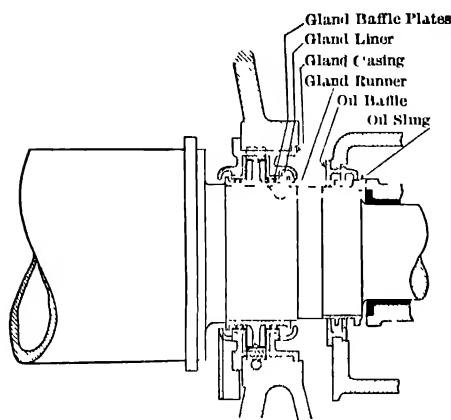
High-pressure Spindle-gland (Allis-Chalmers).
